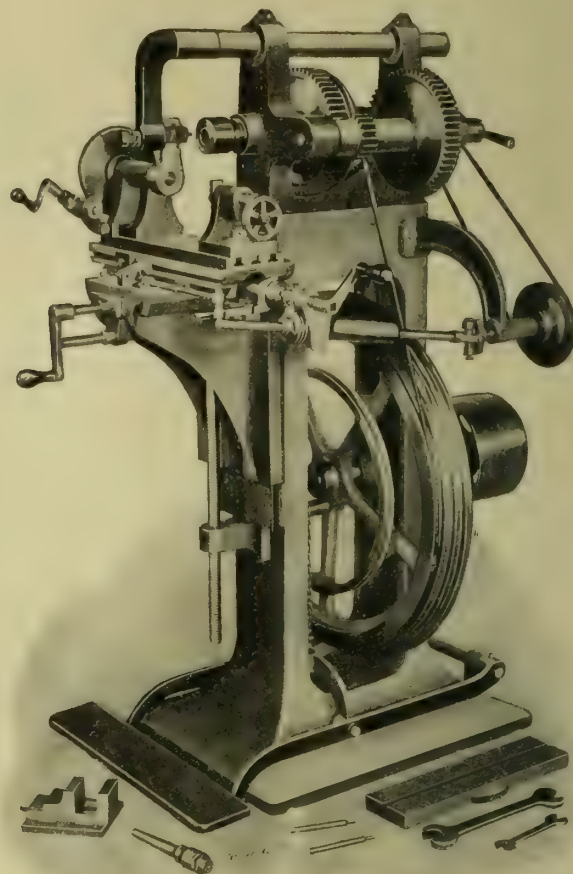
MILLING MACHINE SHOWN BY MR. HENRY MILNES, BRADFORD.
